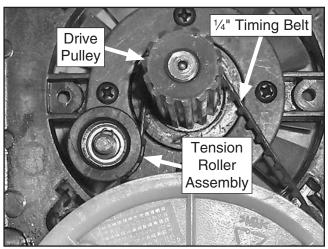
Timing belt installed onto drive pulley and tension roller assembly.
